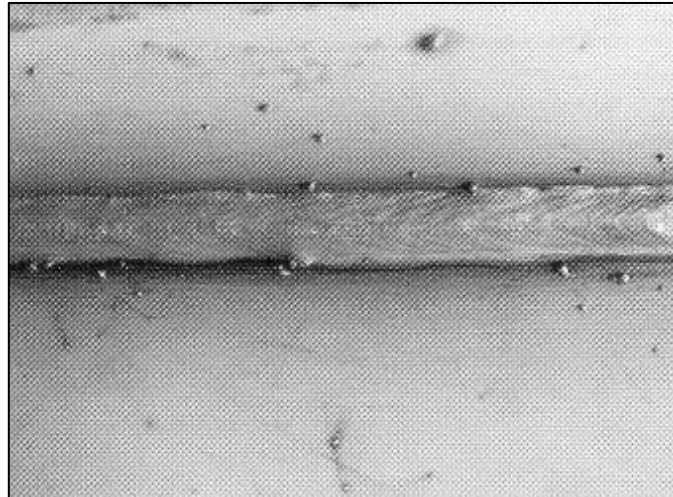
Photo of weld spatter. If left untreated, weld spatter may induce both pitting corrosion and fatigue crack initiation (Outokumpu, 2010).
